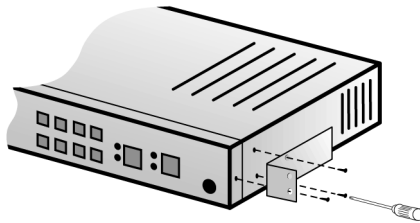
FriendlyNET GX4 Optional Rack Mounting Bracket
